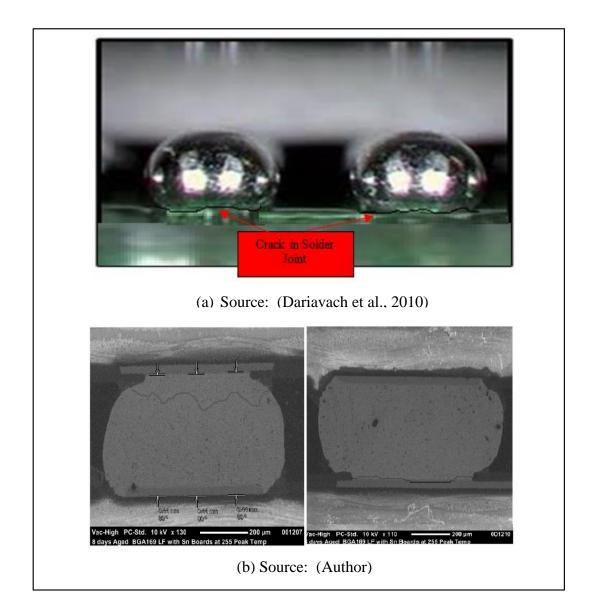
Images of (a) BGA balls cracks, (b) Cross-section of BGA solder joint crack
